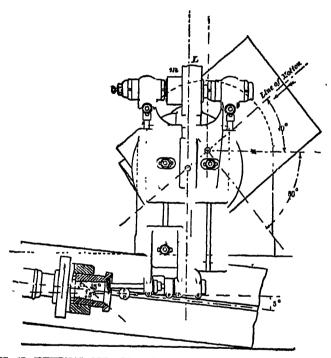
INTERNAL GRINDING OF TWO ANGLES AT ONE SETTING
